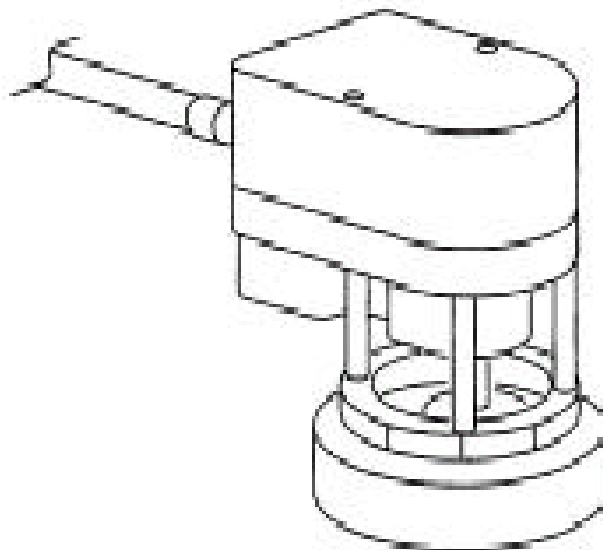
Schematic of the Rivet Check rotating probe head. The rotating probe holds the sensing element, the self-nulling probe, in addition to a drive motor for probe rotation, an angular position sensor, and associated electronics.
